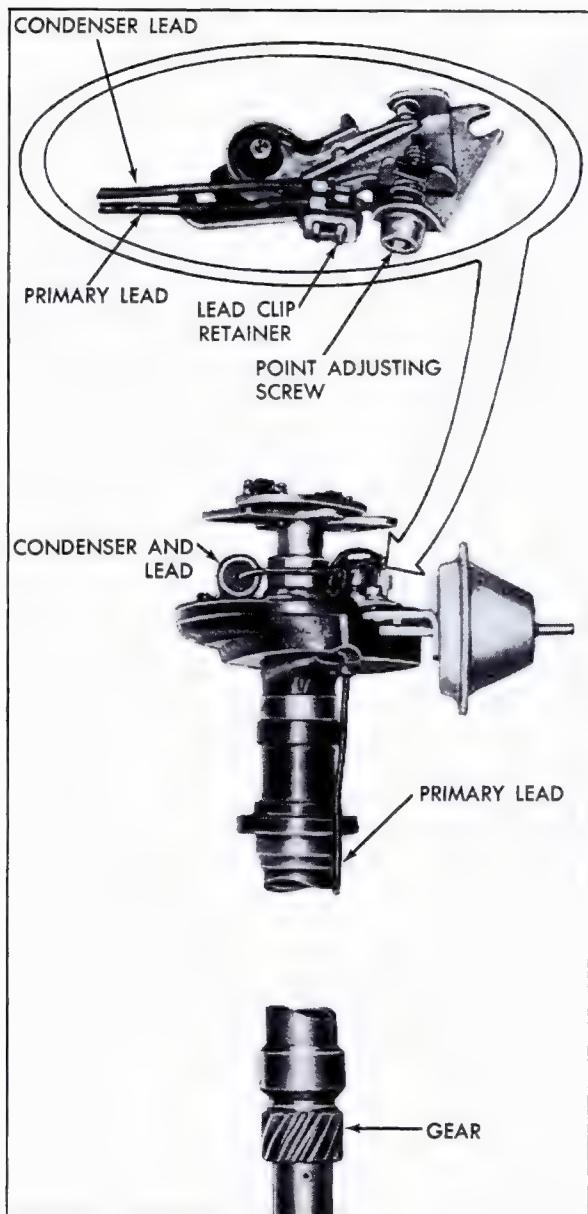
Distributor Point Lead Retainer and Drive Gear
